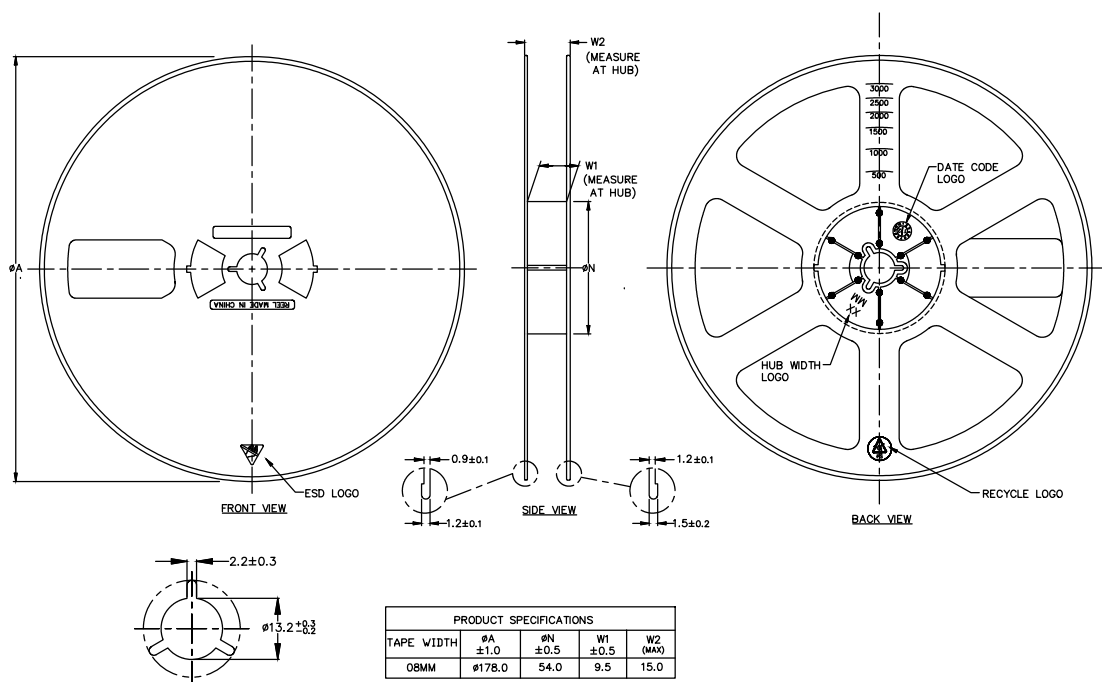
Drawing of reel (first-angle projection) with diameter of 180 mm
